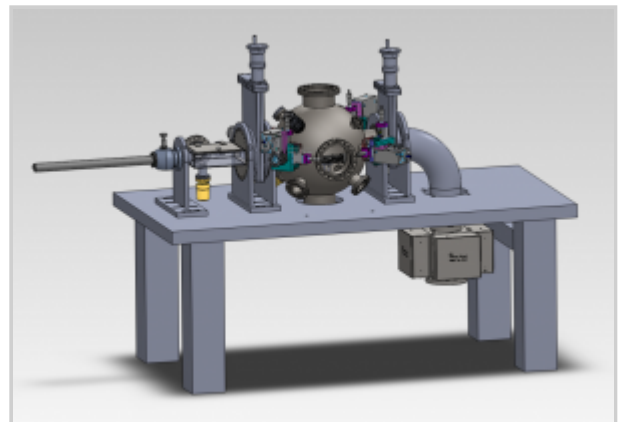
CAD drawing of the UHV chamber design that is capable of testing 150 mm wafer with four high voltage probes at 10^{-10} torr.
